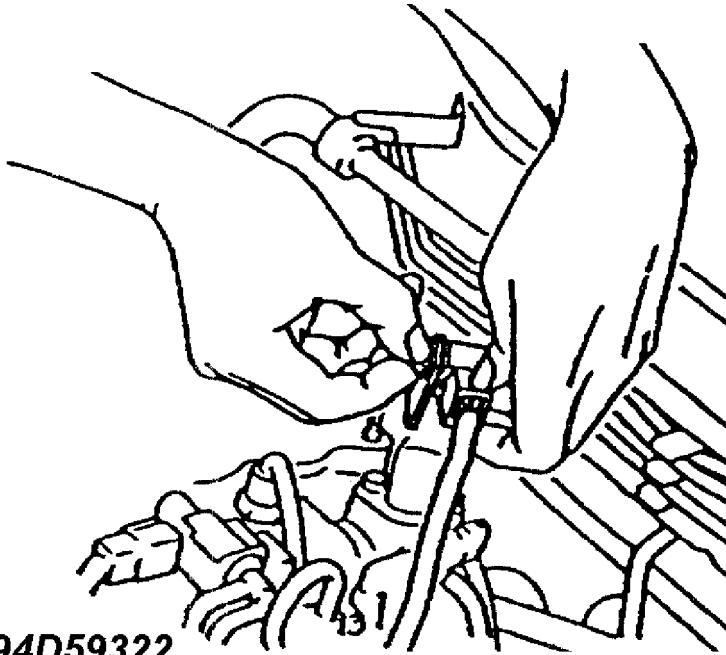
94D59322 O2 Sensor Coupler on the ACV
